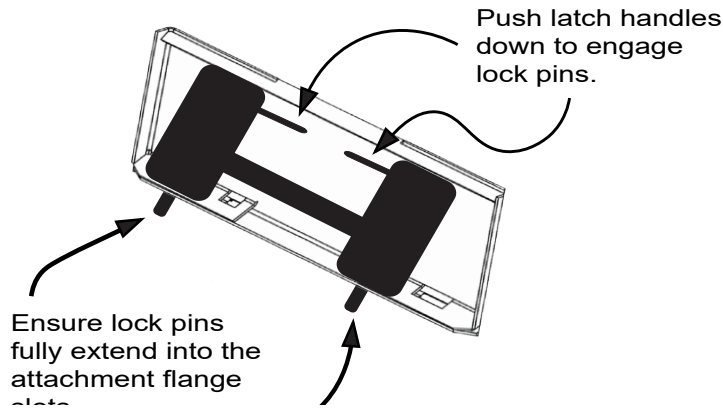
Quick Attach Mechanism Locked to Attachment Plate
